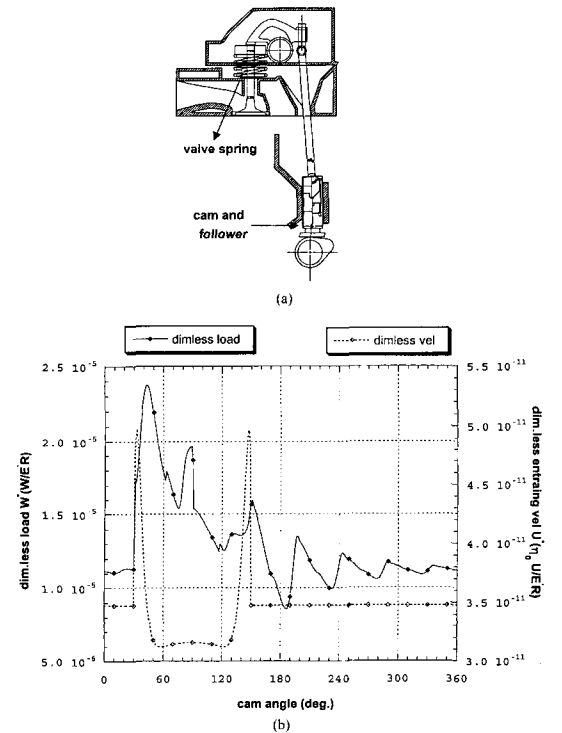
(a) Push-rod type valve train system of diesel engine. (b) Dimensionless load and velocity for push-rod type valve train system of diesel engine.
